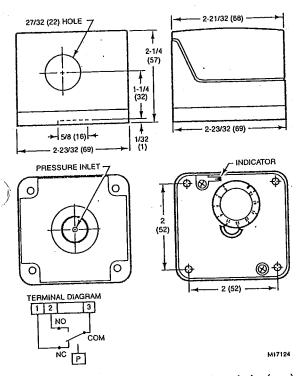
C6097 Flange Mount dimensions in in. (mm).
